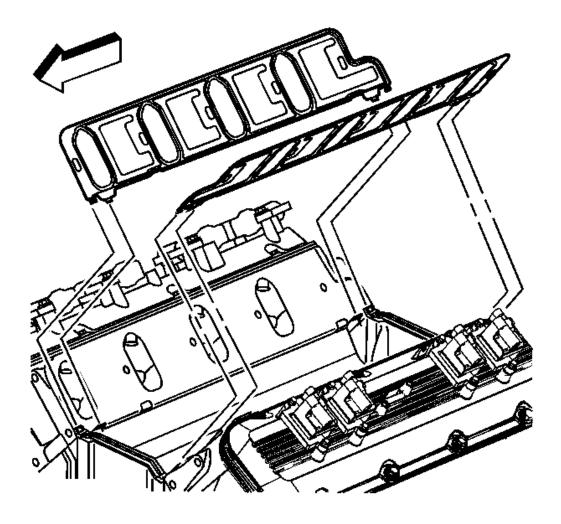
View Of Intake Manifold Side Gaskets Courtesy of GENERAL MOTORS CORP.
